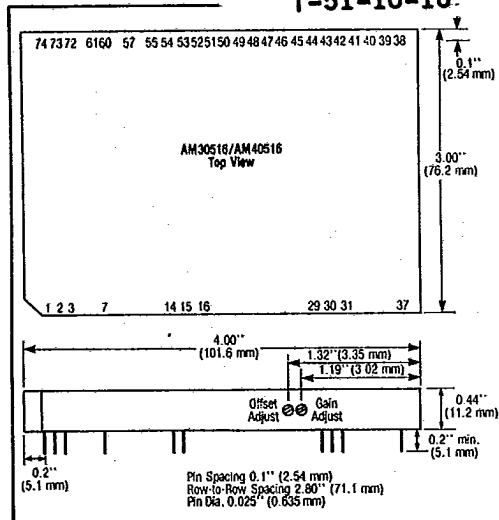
AM30516/AM40516 Outline Drawing & Pinouts.
